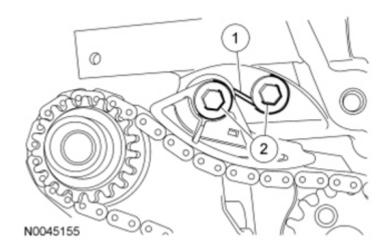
Locating Shoulder Bolts And Tensioner Courtesy of FORD MOTOR CO.
